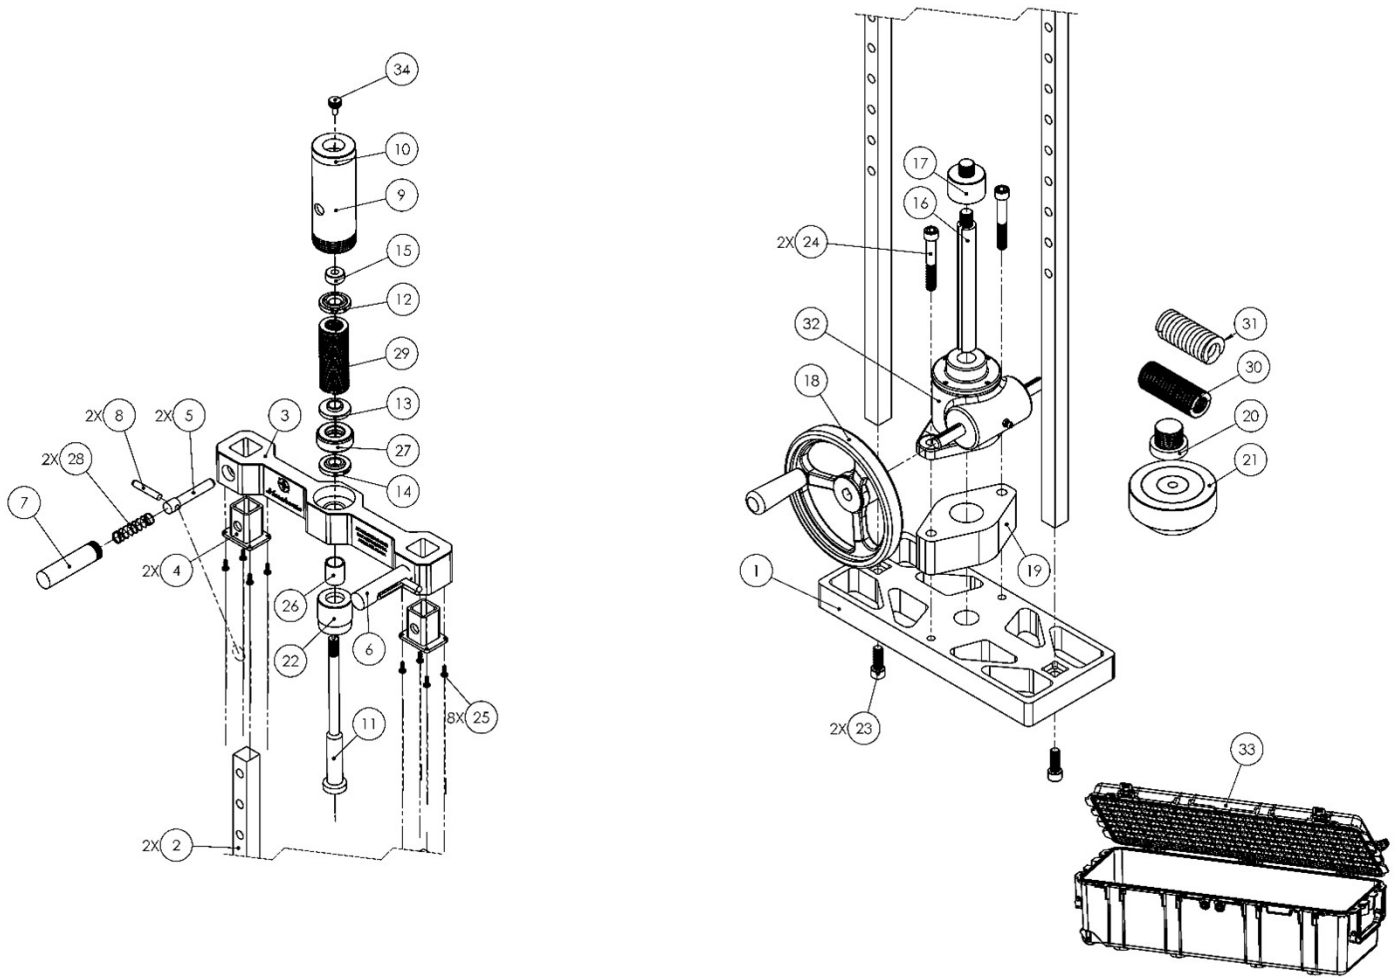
General Assembly of a Portable Calibrating Machine, Model: PCM-2MD-02
